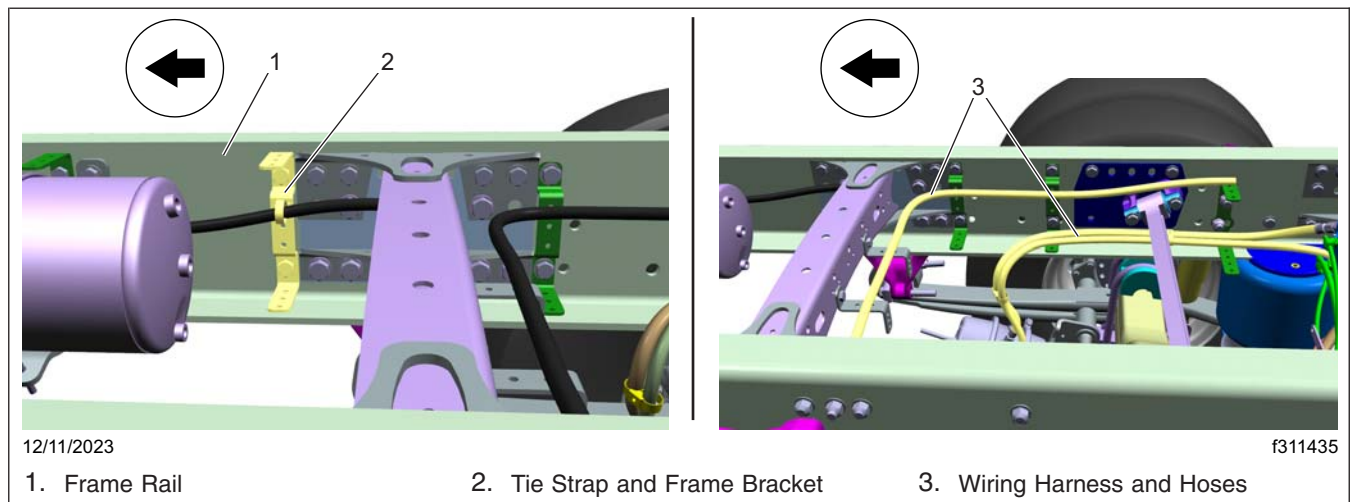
, Right-Hand Frame Bracket, Wiring Harness, and Hoses
